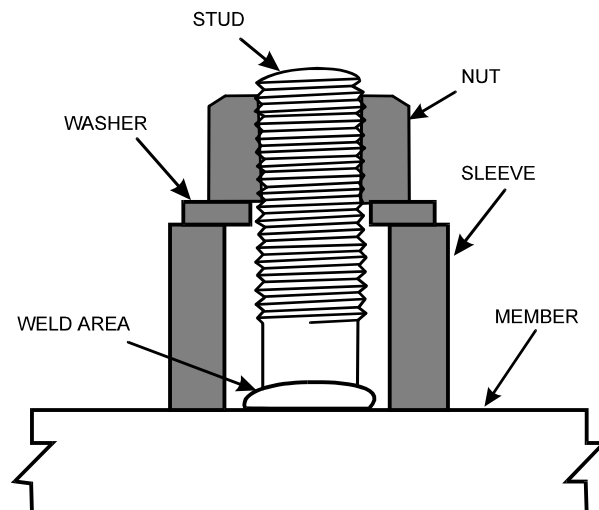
Torque Testing Arrangement For Stud Welds (see 7.6.6.4)
